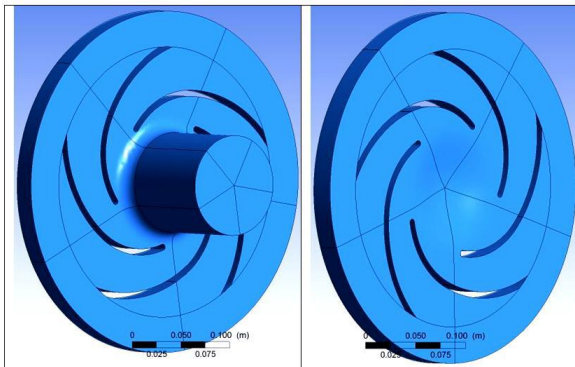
Three dimensional CAD model of centrifugal pump impeller
